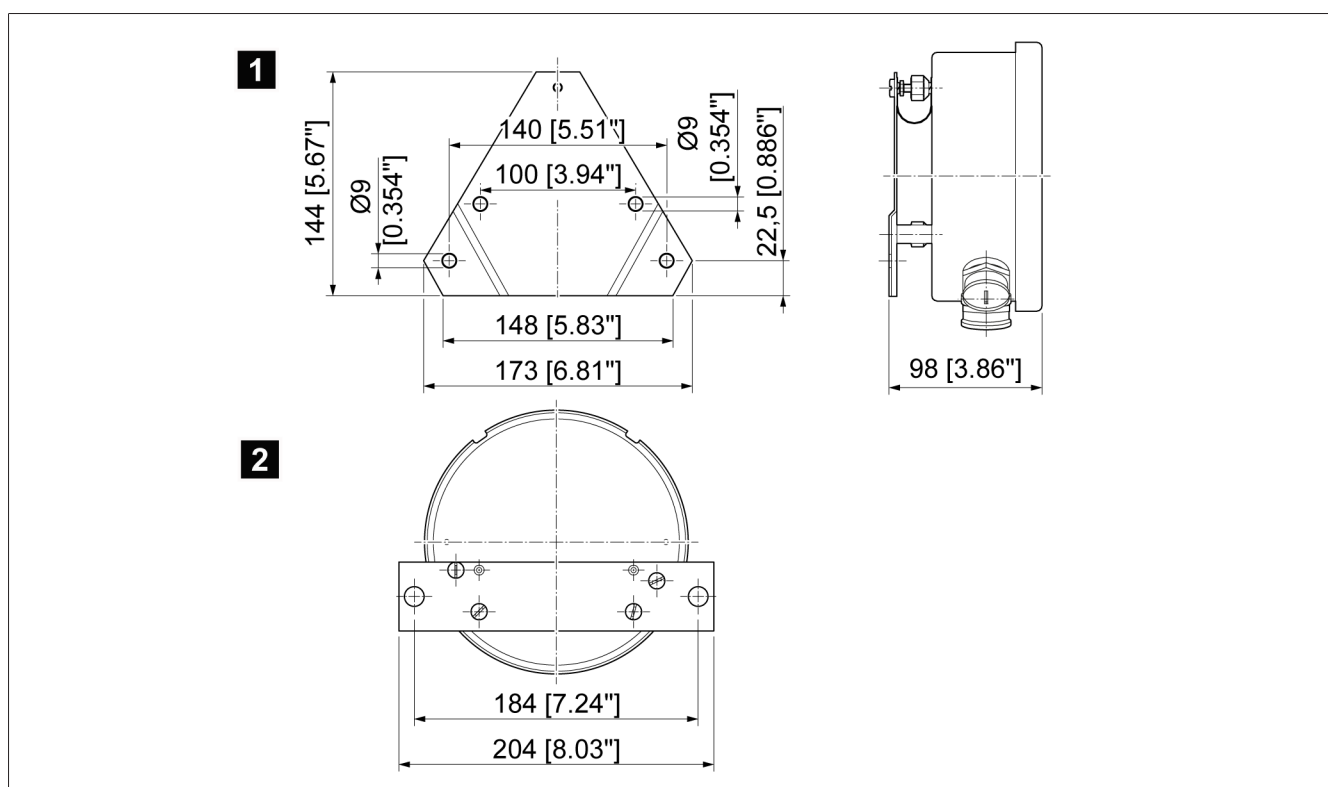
Dimensional drawing for vibration-damping plate and mounting plate
